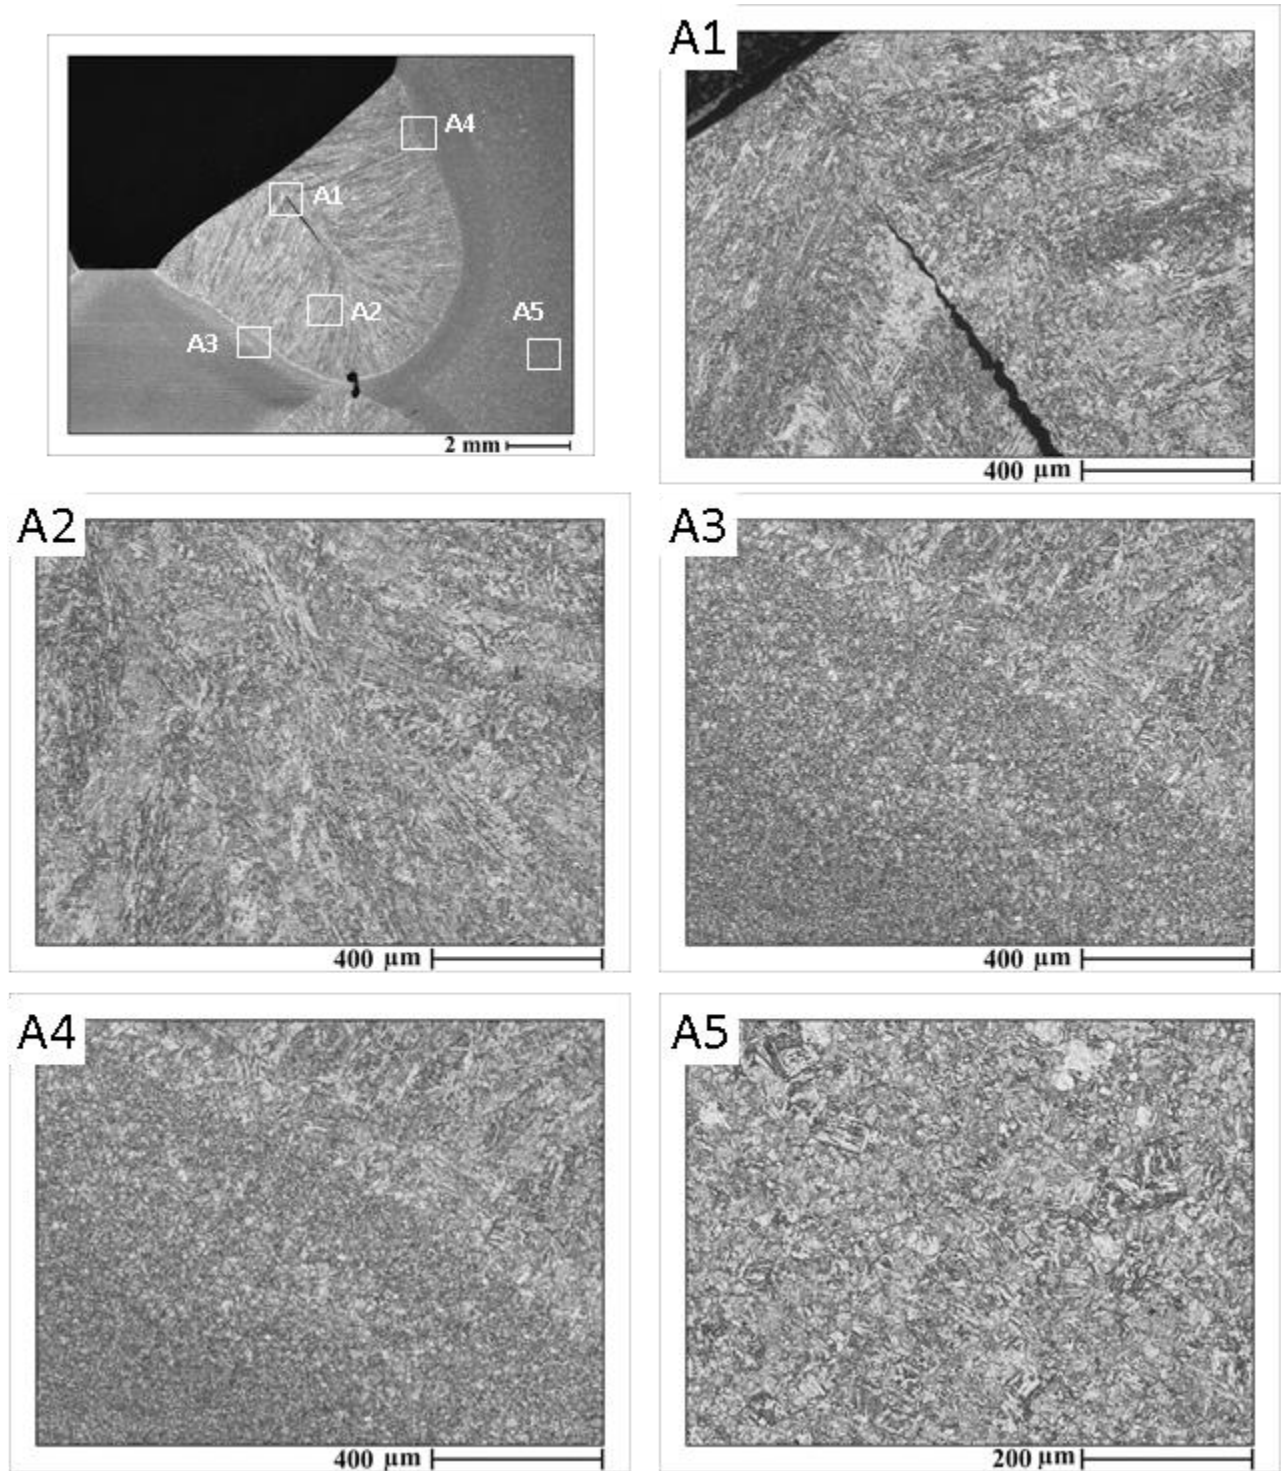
o Micrographs from the Tube3-Tube4 weld on the final T92 prototype panel
